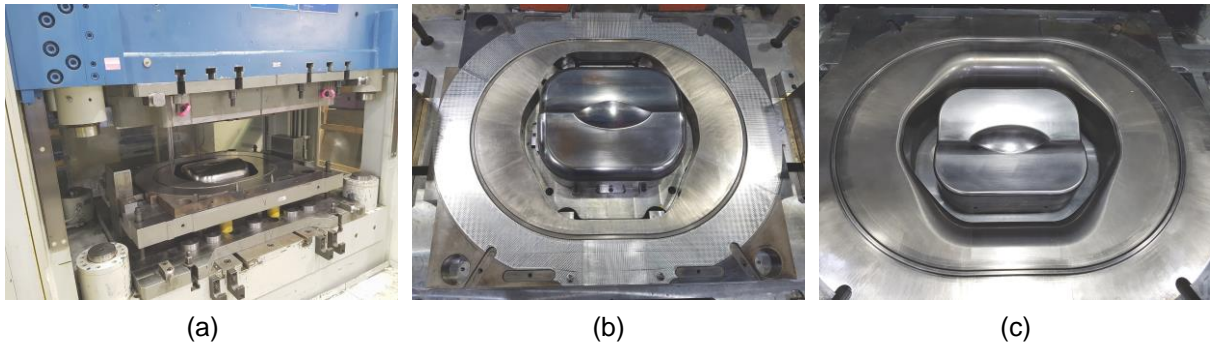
Deep drawing tool (a), upper part (b) and lower part (c) for the experiments
